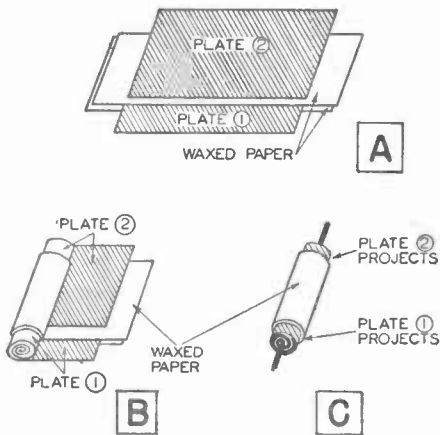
How paper condensers are made. Waxed paper sheets separate the plates, which are tin or aluminum-foil sheets. After the condenser is rolled up, the projecting ends of the plates are crimped around the spirals formed by the connecting wires. The wires are soldered to tin-foil plates but cannot be soldered to aluminum-foil plates. Instead, the wire spiral is filled with solder and is pressed tightly into the foil. This mechanical joint is held only by wax and the container, so frequently comes apart.
